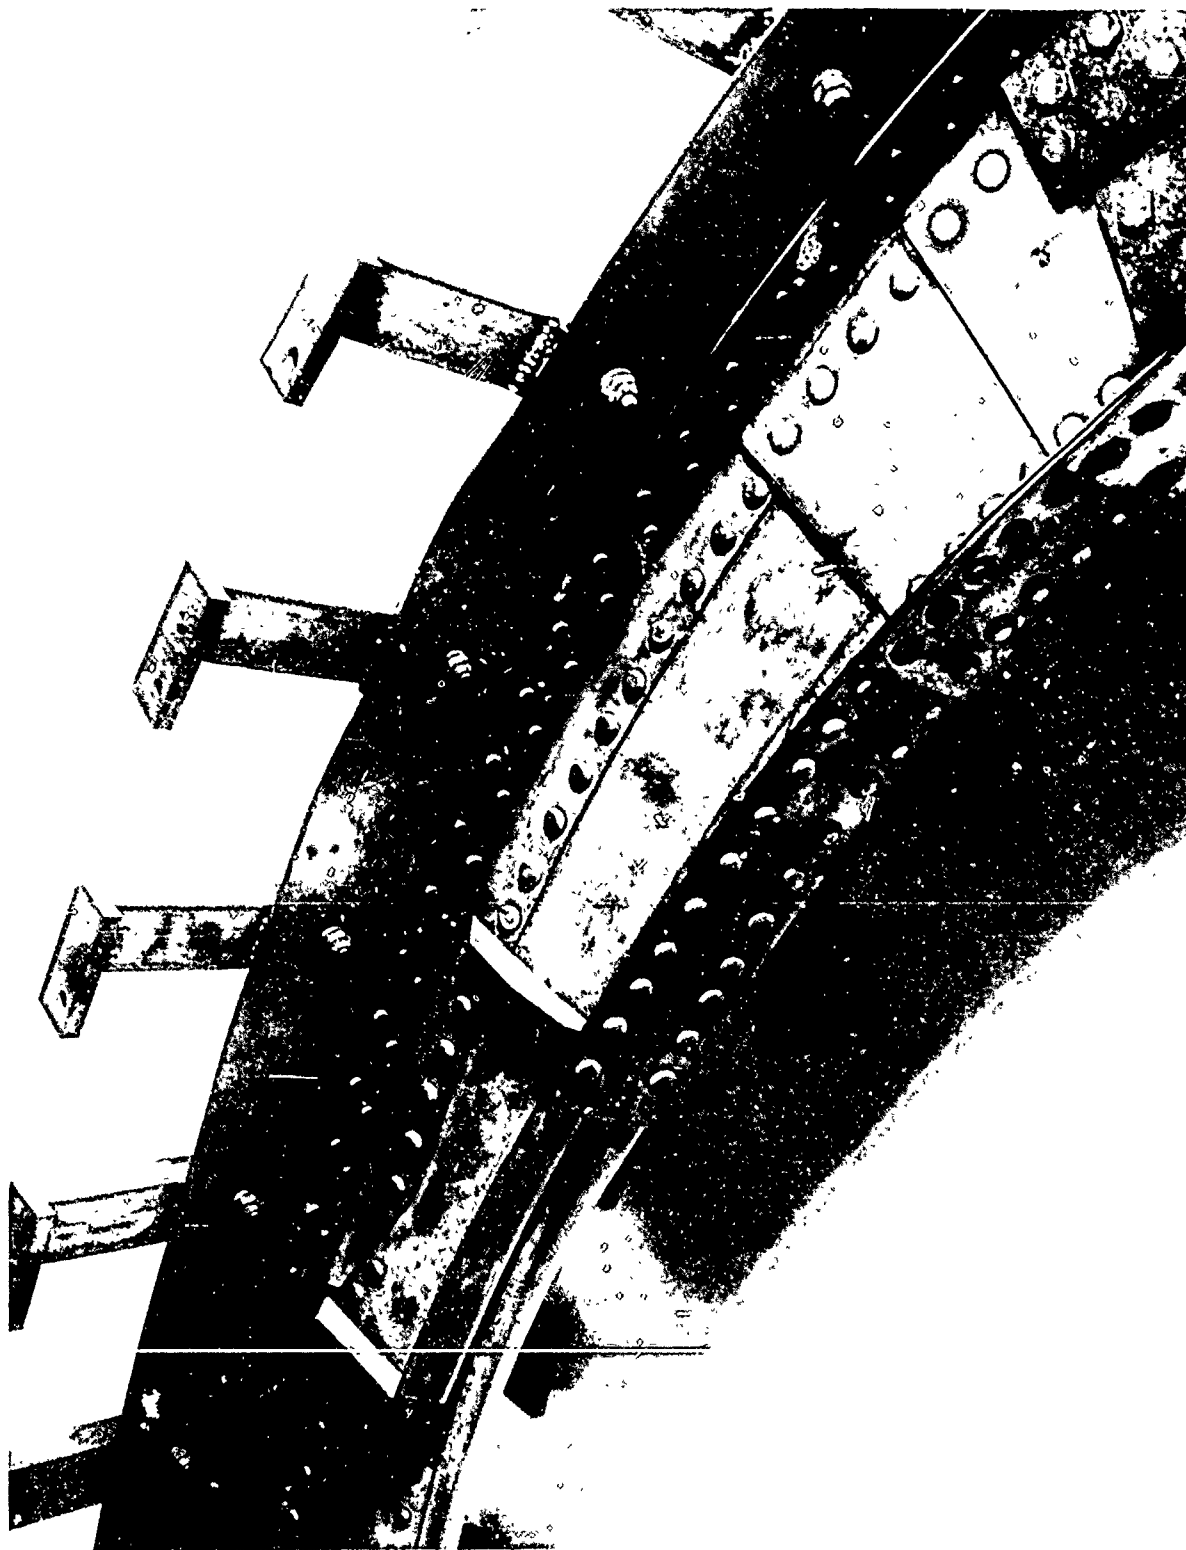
RIVETED FUSELAGE CANTED BULKHEAD ASSEMBLY;
